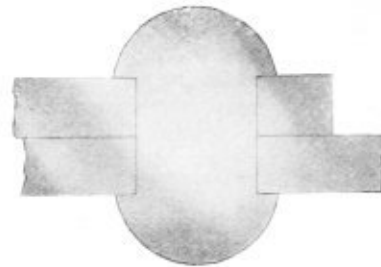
Rivet Driven by Heavy Hydraulic Riveter
